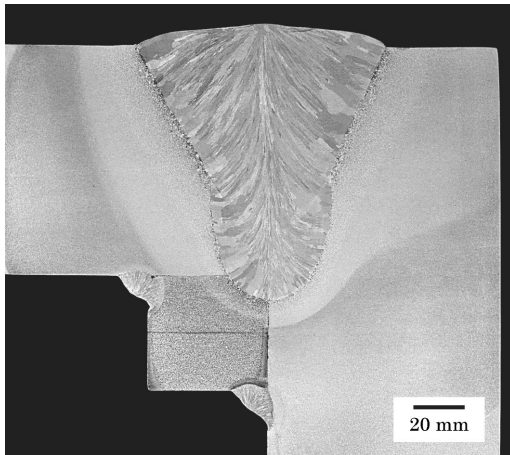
Cross-sectional macro comparison of [T] PF-I80ES / [T] US-80SP welded joint
